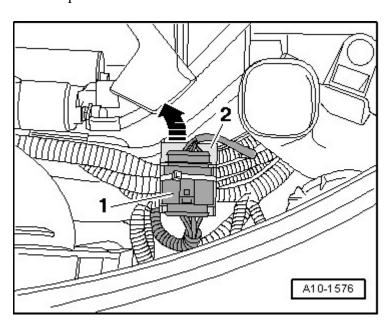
Engine Wiring Harness Bracket Courtesy of AUDI OF AMERICA, LLC
